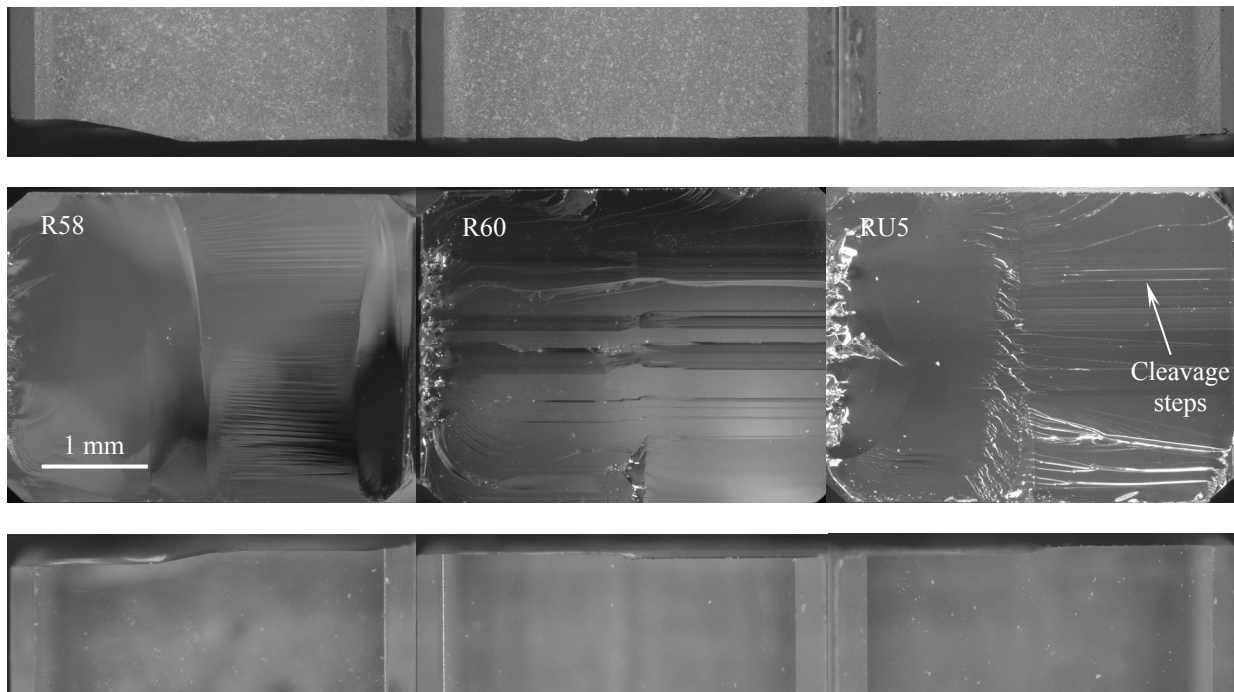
Top and side views of the fracture surfaces of *r*-plane PB test specimens.
